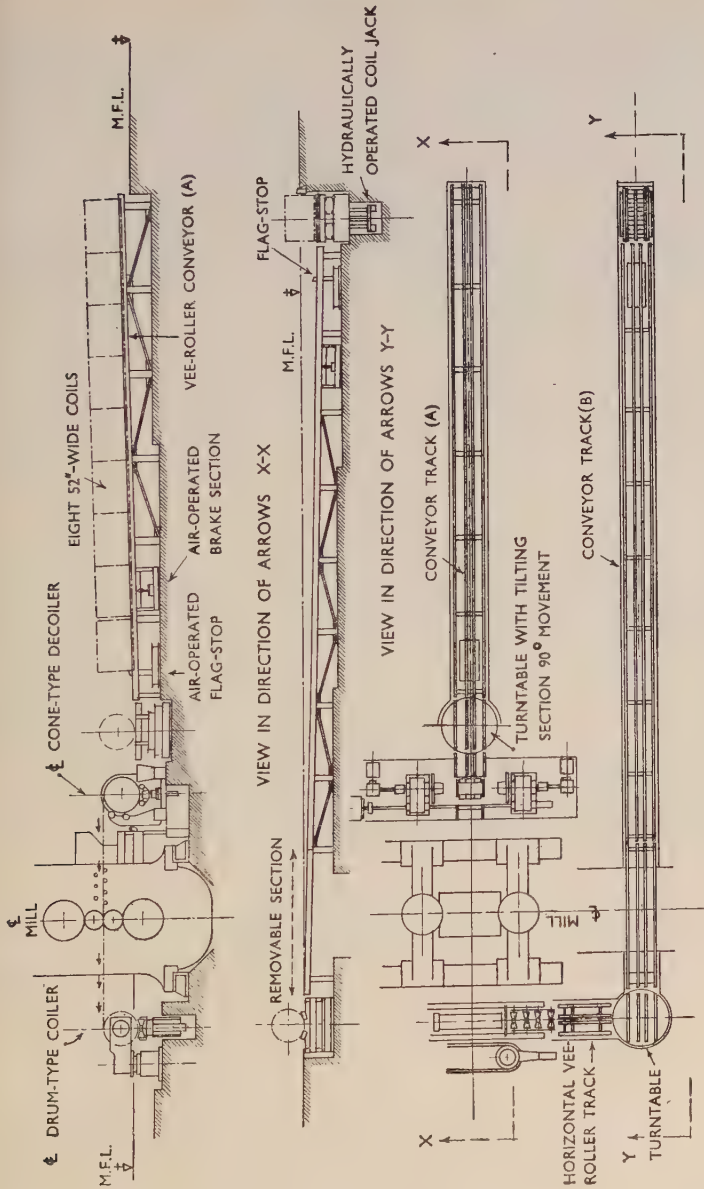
Arrangement of Coil-Handling Equipment for Non-Reversible Mill (Batch-Rolling).
